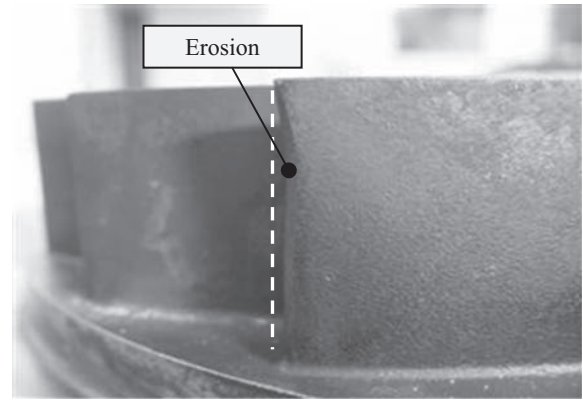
Nozzle ring with thermal spray coating after 10,000 hours use (after cleaning)
